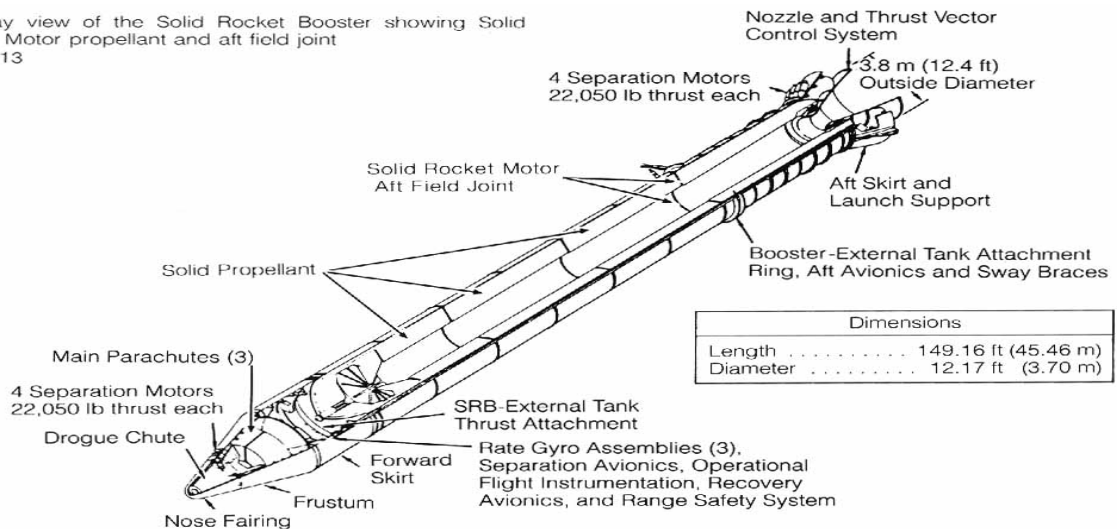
Cutaway view of the Solid Rocket Booster with aft field joint. (10)
